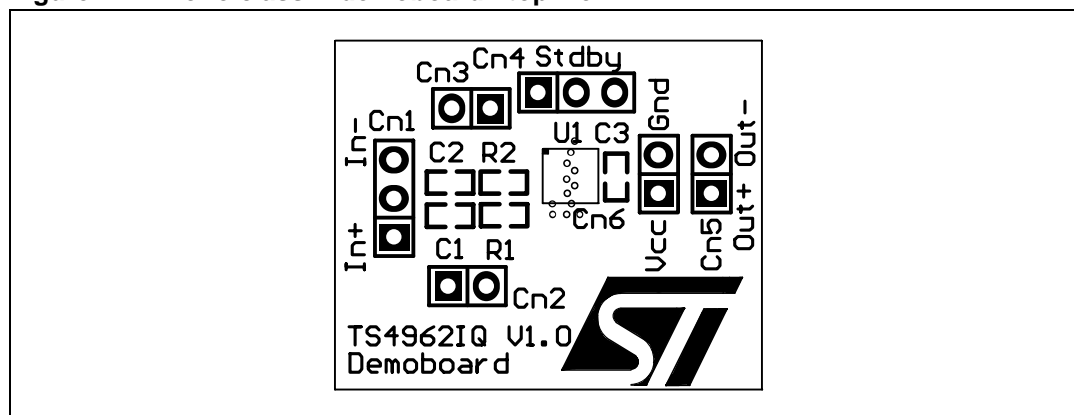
shows the top view of the demoboard PCB, with the markings showing the connector placements.
